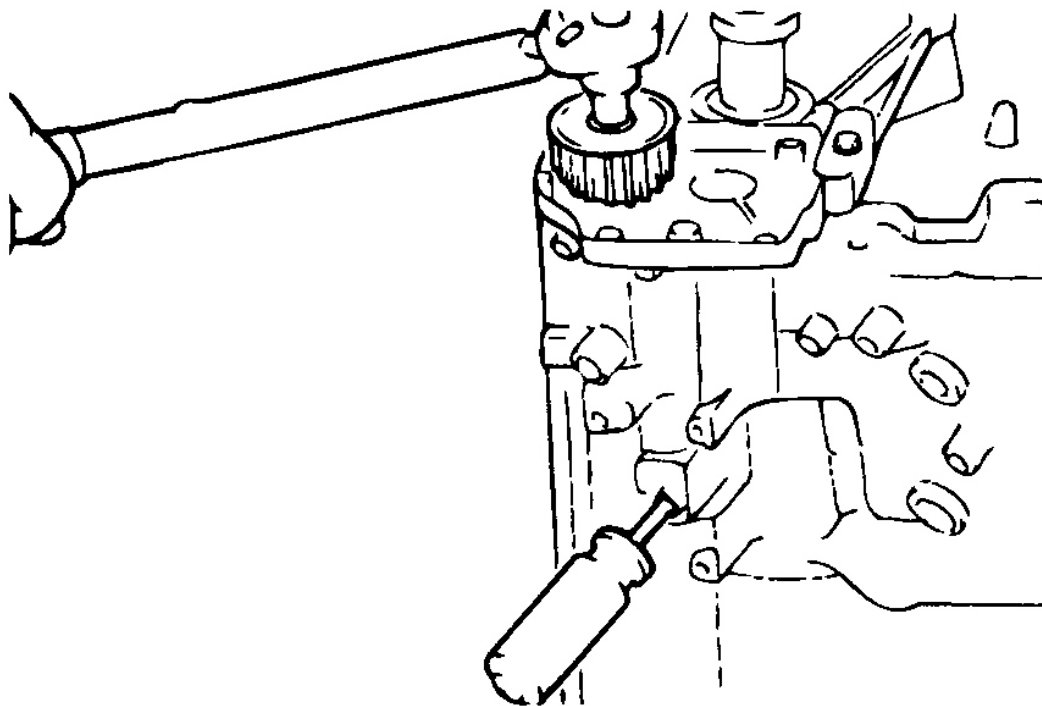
Inserting Screwdriver Through Plug Hole In Left Side Of Cylinder Block
